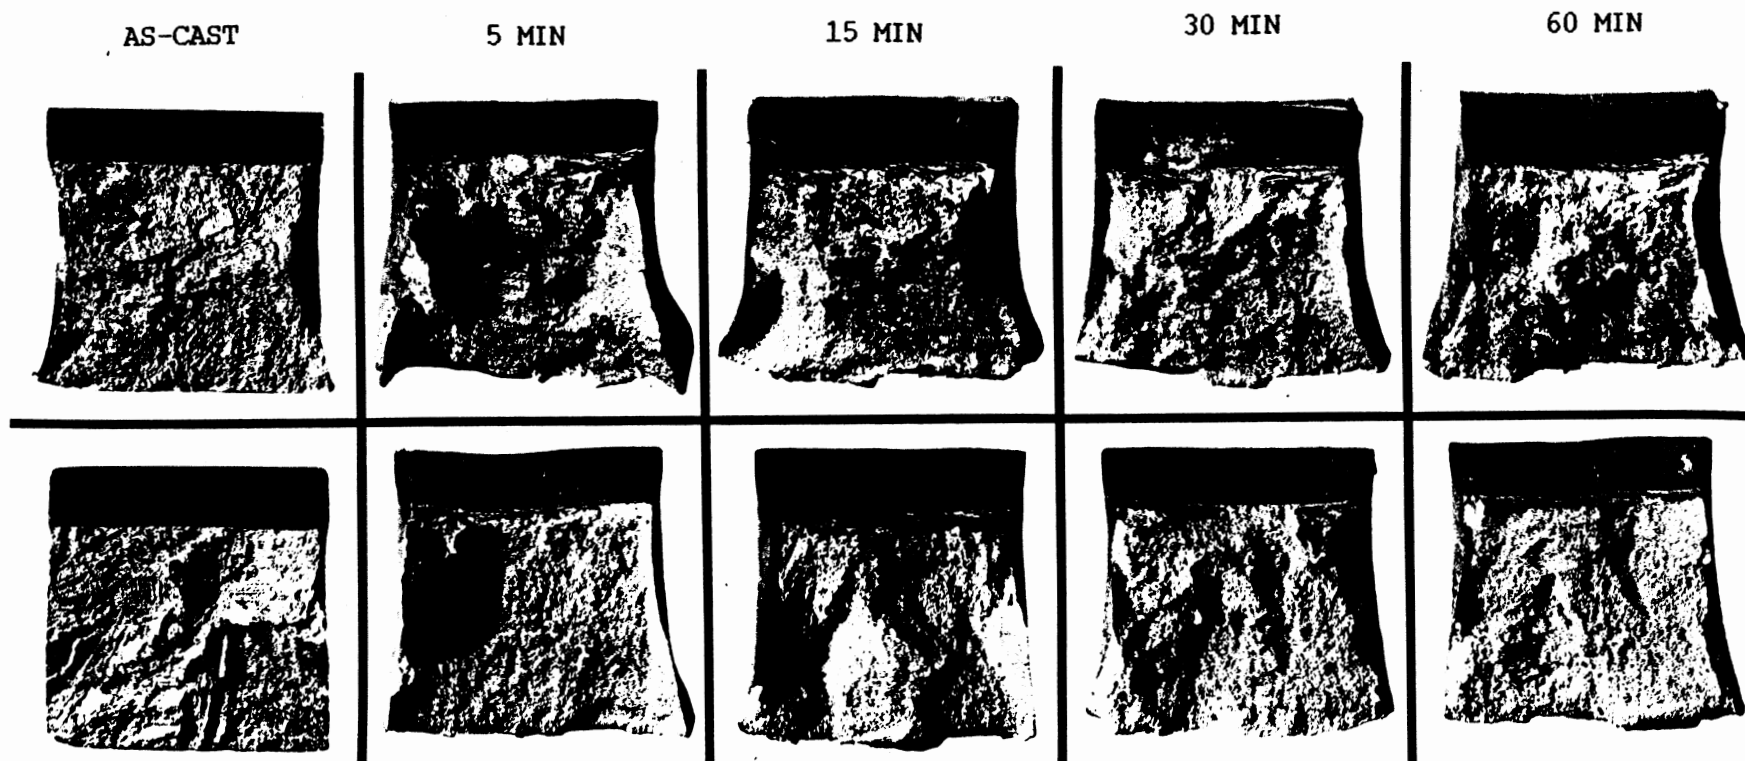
Insulated Mold Charpy Impact Fracture Surfaces.
